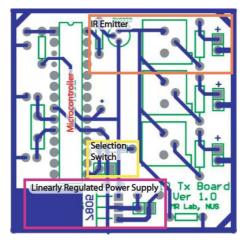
PCB layout of IR Emitter with main modules labelled.
